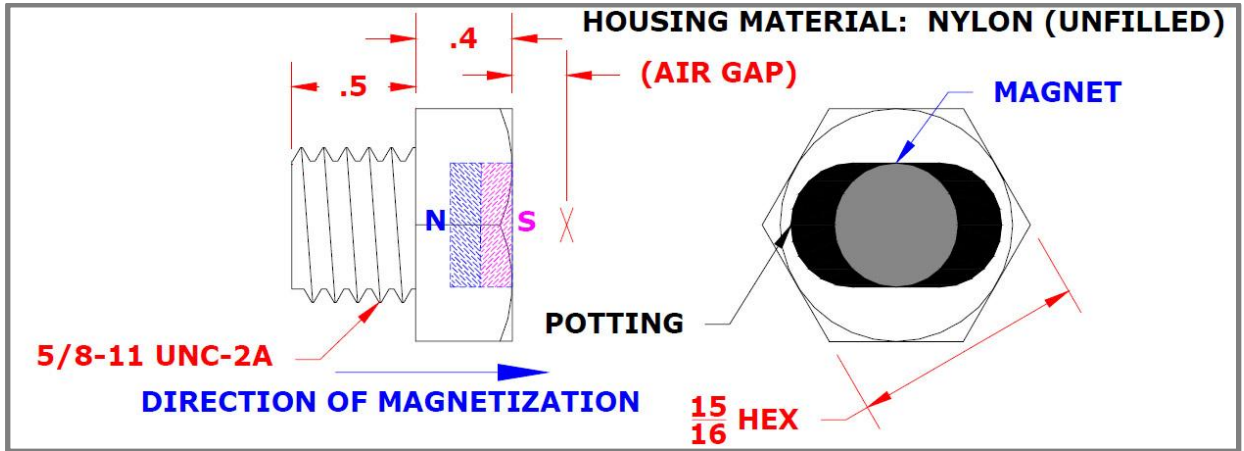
Magnetic Bolt Drawing (Dimensions in inches)
